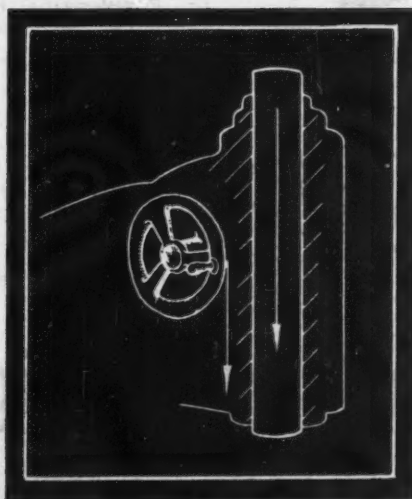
Left—Portion of handwheel rim closest to eye should move in same direction as the machine motion it inaugurates
